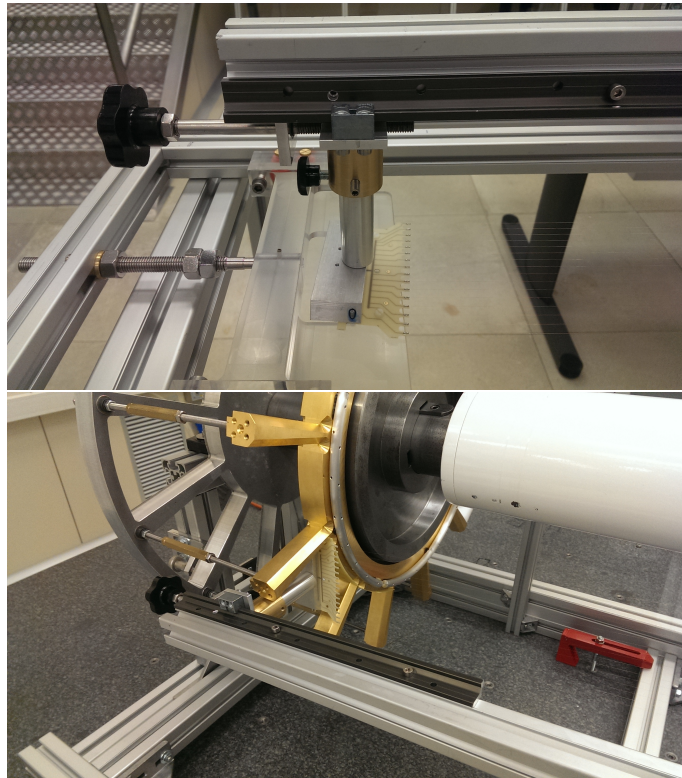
Top: A block of the adjustable arm with wire PCB. Bottom: Engagement procedure
